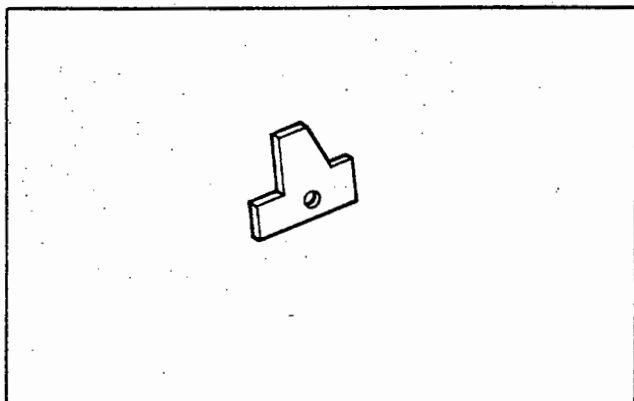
T25939 Enrichment Valve Screw Adjusting Assembly Gage
